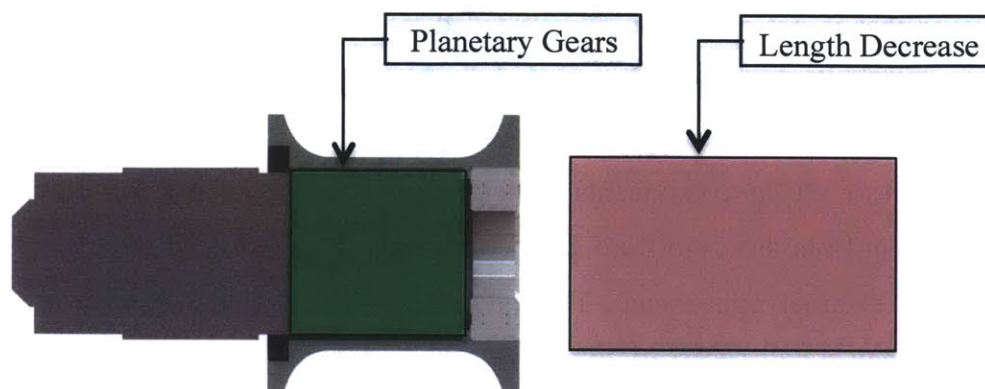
Improved Configuration of Capstan Pulley and Planetary Gears
